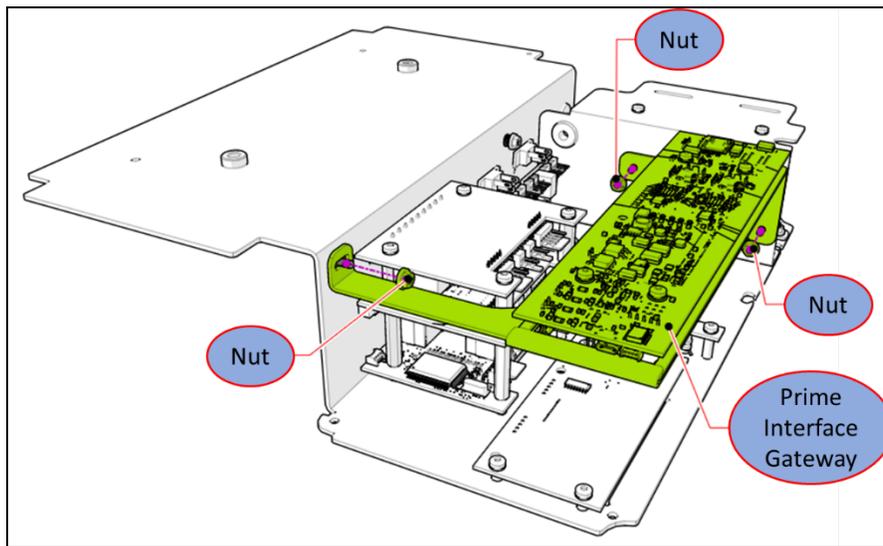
Prime Interface Gateway Assembly Secured to the Chassis
